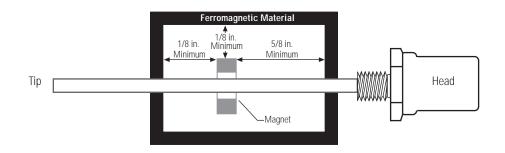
Minimum Magnet Clearance Using Magnetic Supports
